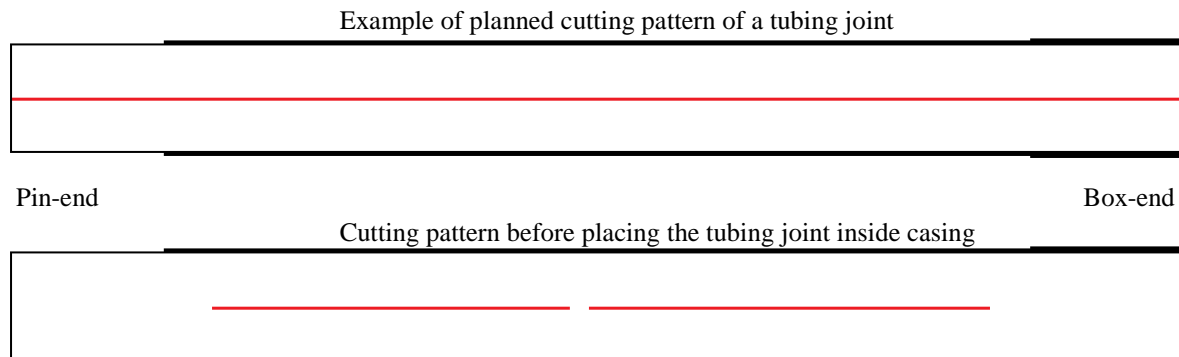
Illustration of how tubing can be cut prior to placement inside casing.
